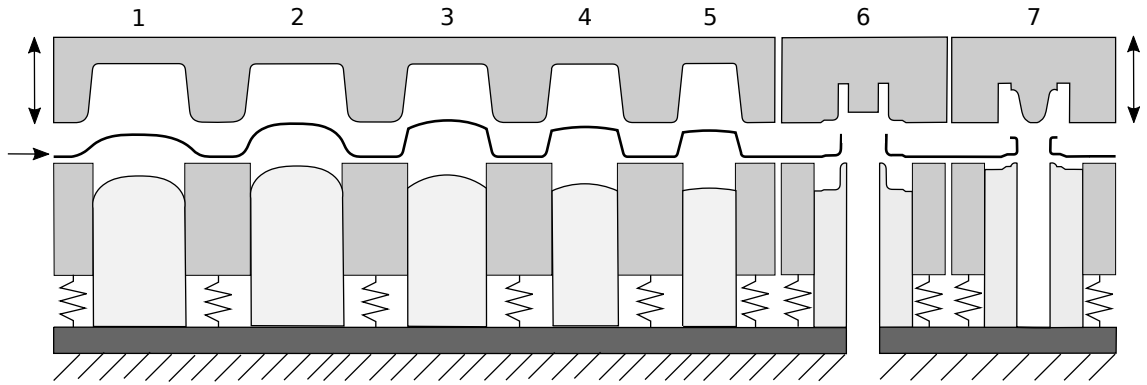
An illustration of the 7 steps in the manufacturing of the fins, where the plate material is fed from the left and the top part is moved downwards, which deforms the material. The first 5 steps are drawing operations, where the material is deformed into a cup-like shape. The 6. step performs a cutting operations and straightens the vertical part, also called dimpling, and in the 7. step the vertical part is formed into a open hem.
